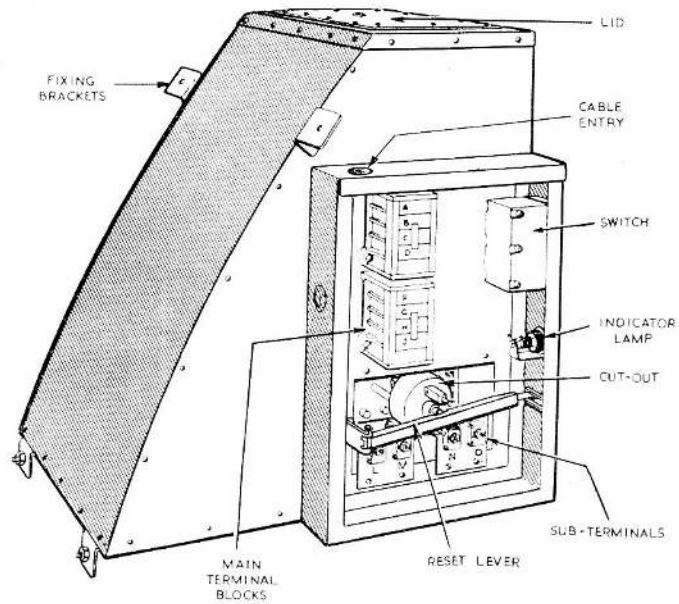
Urn, G.E.C. Type H.E. 46483 M1 with side cover removed
